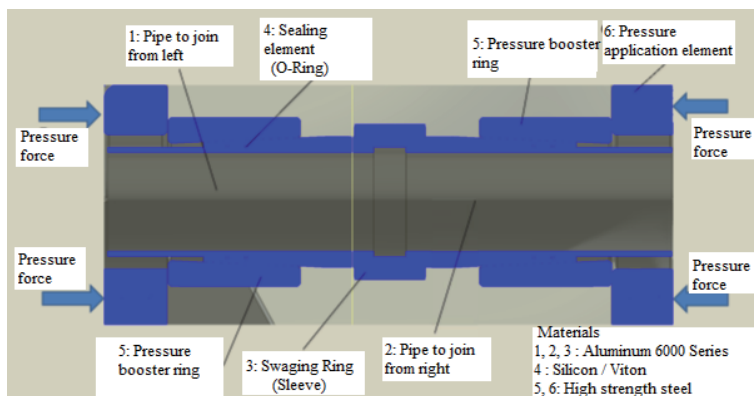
Swaging type C; radial swaging by tightly compressing the pressure booster (wedge) fitting to the swaging circle fitting by axial pressure force [13].
